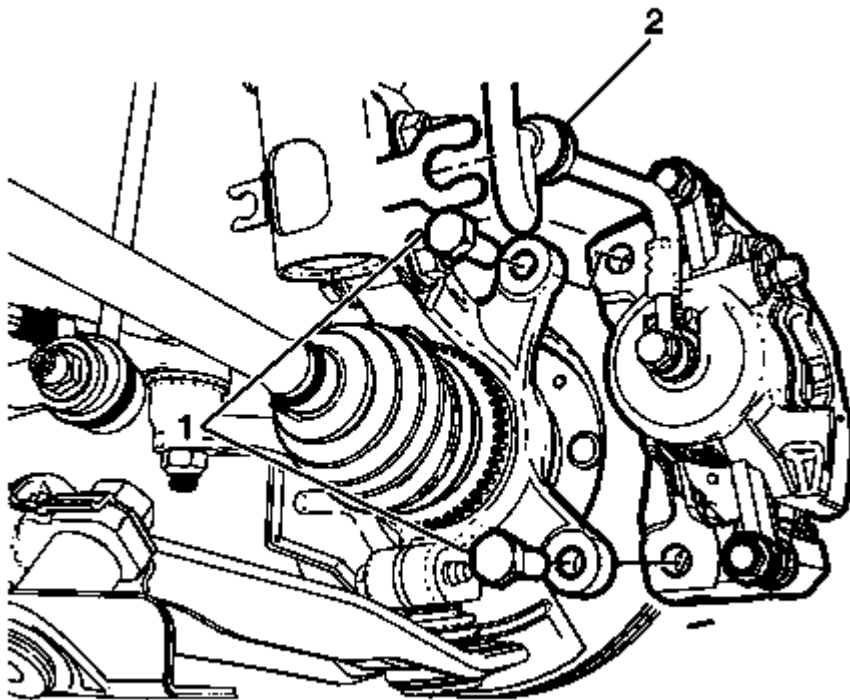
Front Brake Hose And Front Brake Caliper Retaining Bolts
